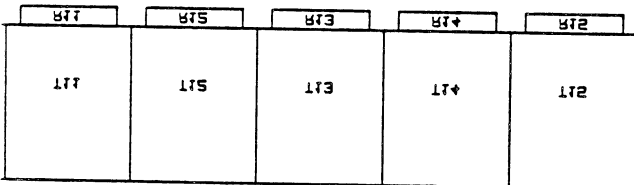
Component layout of CBM 31, x-ray view from solder side.
